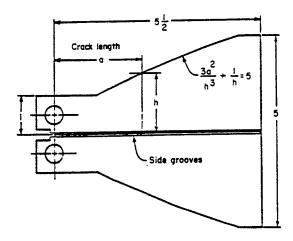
Typical Tapered Double Cantilever Beam (TDCB) Specimen with Side Grooves.
